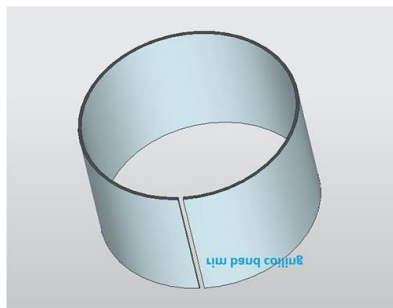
Design of steel plate conformed in the shape of a rim, source: LittleDuck, wheelmachinery
